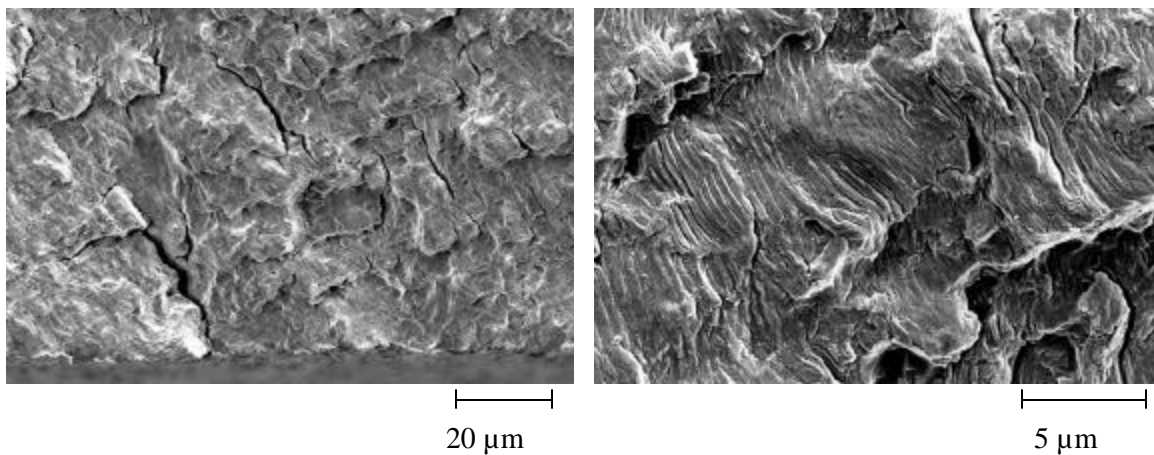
Fracture surface showing secondary cracking perpendicular to the crack plane as evidence of multi-axial stresses.
